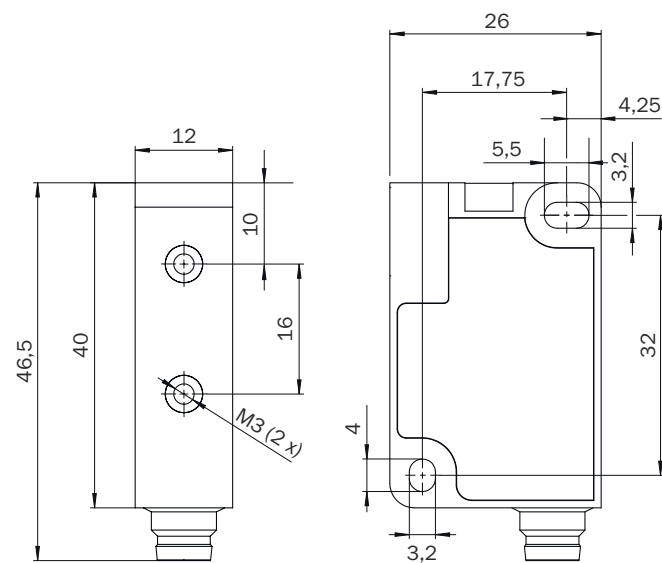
IQB2S12-\*\*-B\*\*TO dimensional drawing
